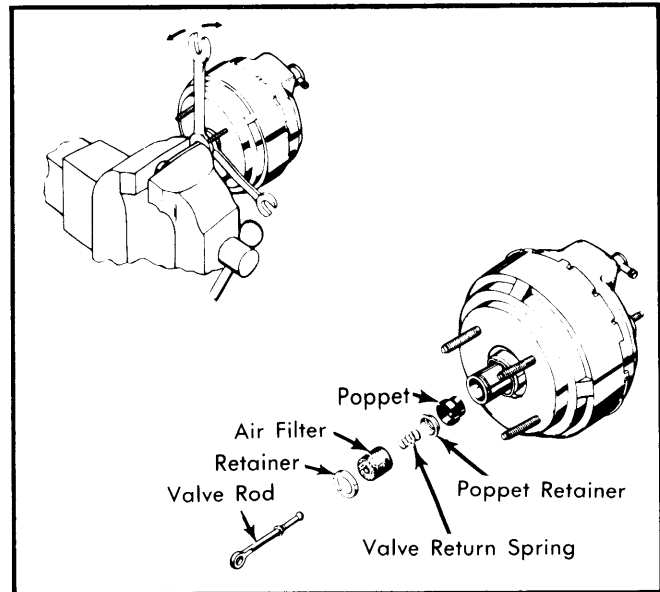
Valve Rod Disassembly Showing Way to Pry Air Valve Off Ball End of Rod and Exploded View of Valve Rod Components
